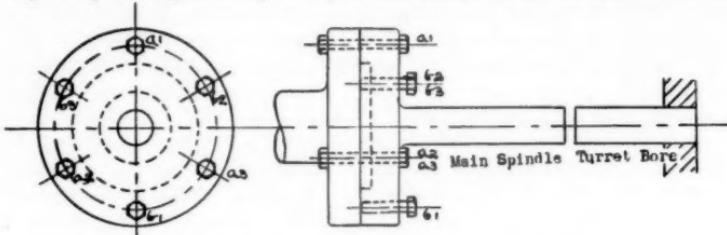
Two-mandrel alignment test (capstan lathe).
